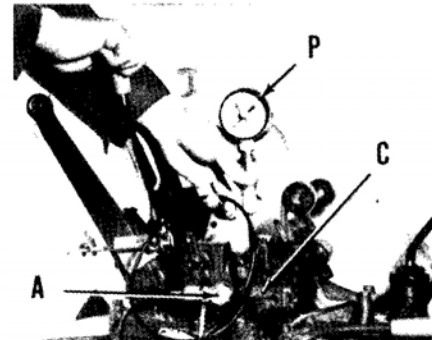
View showing special Kubota adapter (A) and pressure gage (P) (Tool kit 07916-50041) installed in control valve (C) pressure line inlet. Refer to text.
